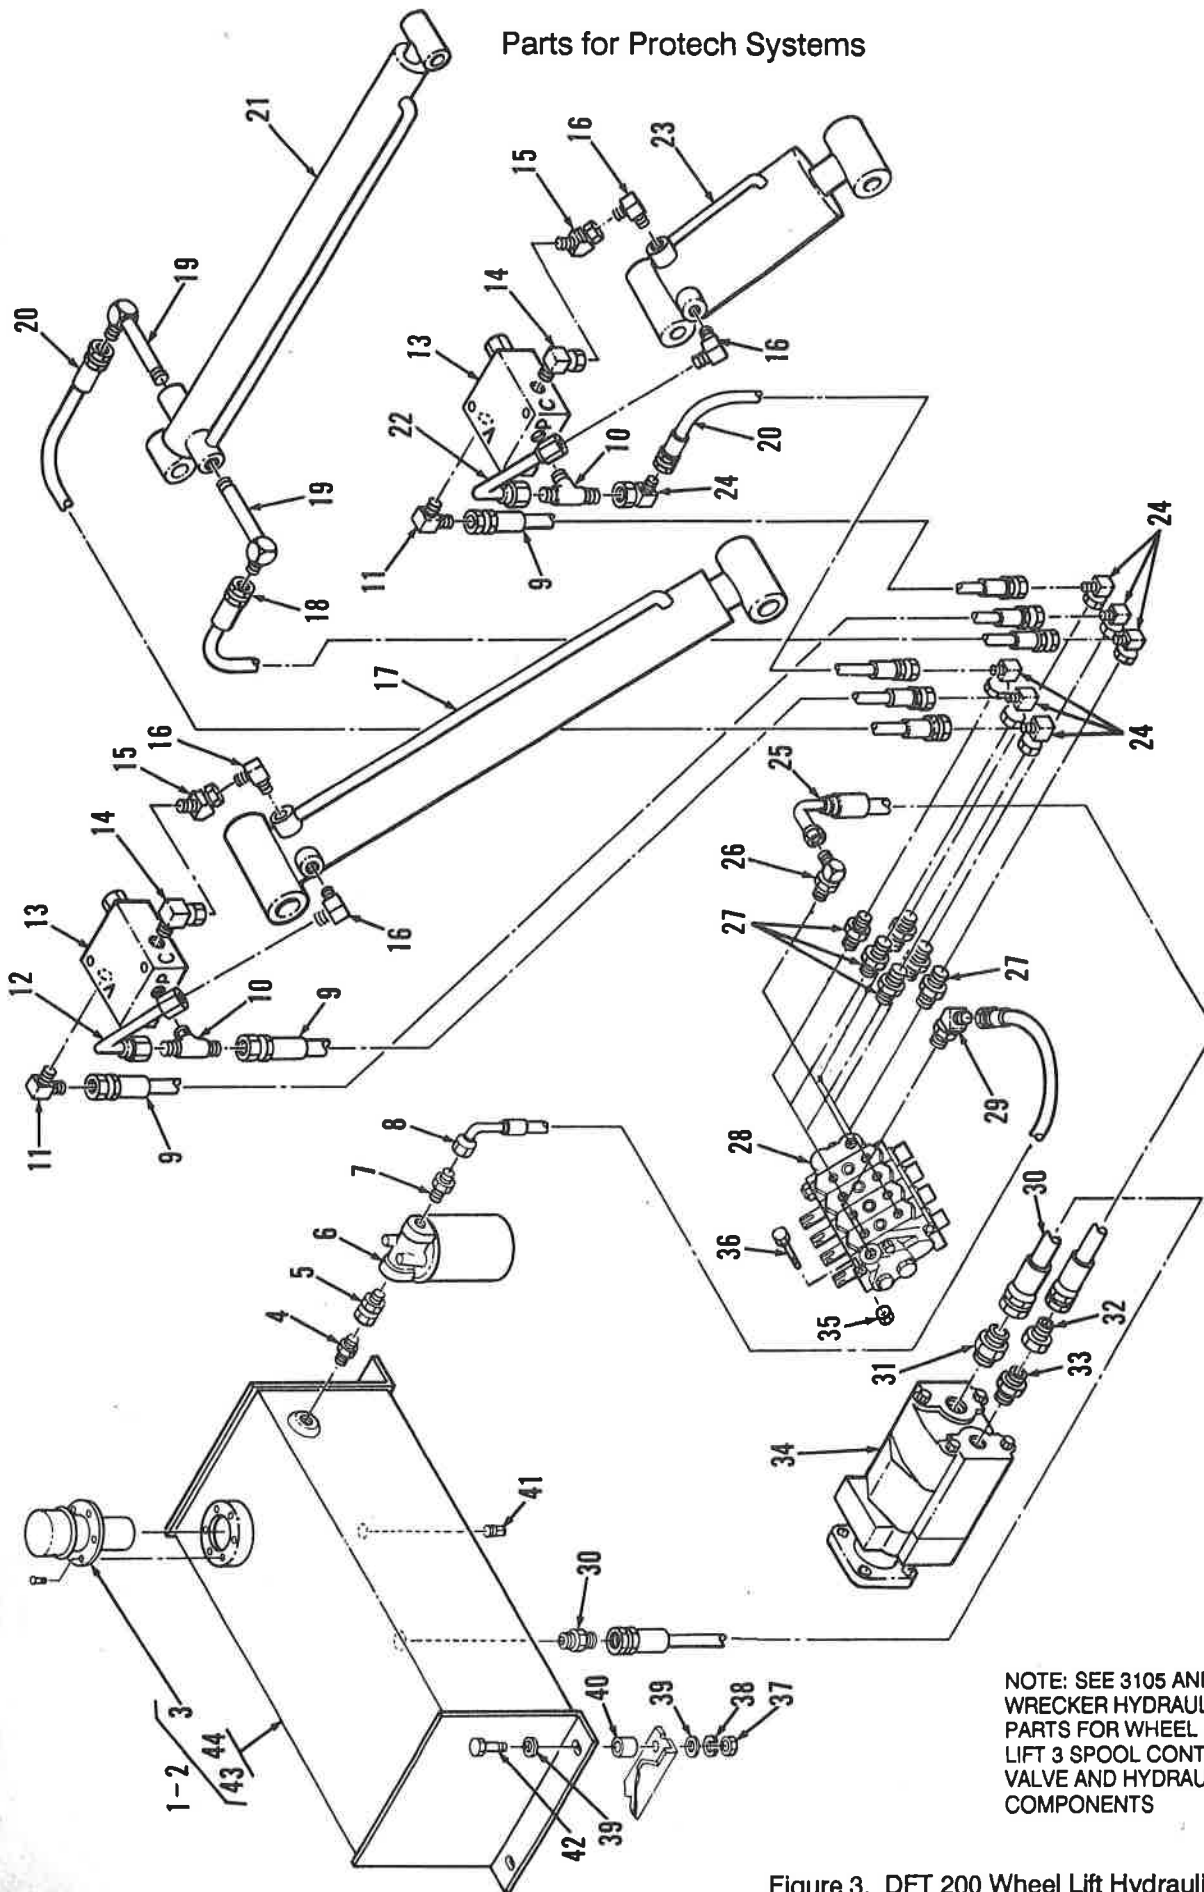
DFT 200 Wheel Lift Hydraulic Parts.
